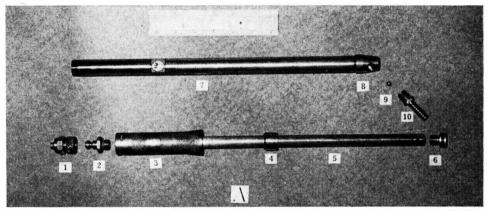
Unit "A" hand pump. (1) Snap-on spray attachment, (2) Nozzle, (3) Hollow hand-grip, (4) Cylinder cap containing felt wiping ring, (5) Plunger. (6) Outlet valve assembly with neoprene piston ring. (7) Cylinder, (8) Cylinder tail-end piece, (9) Inlet valve ball, (10) Inlet valve body and hose connection (not the usual snap-on coupling). Note 6-inch rule.
